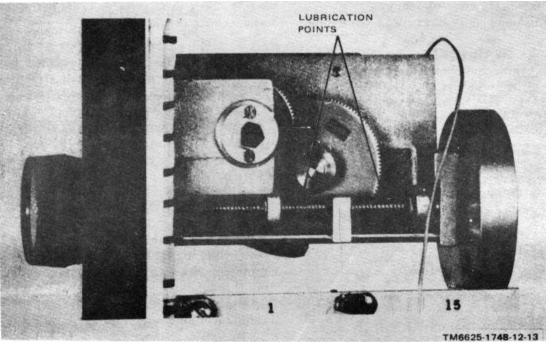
Tuning Drive Assembly TN-527/U tuning unit, showing lubrication.
